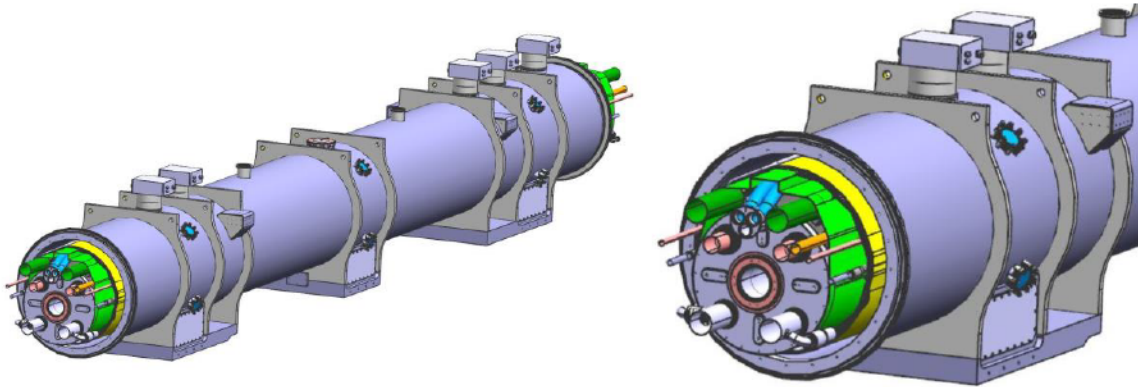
Model view of the complete Cryo-Assembly and the non-IP end.
